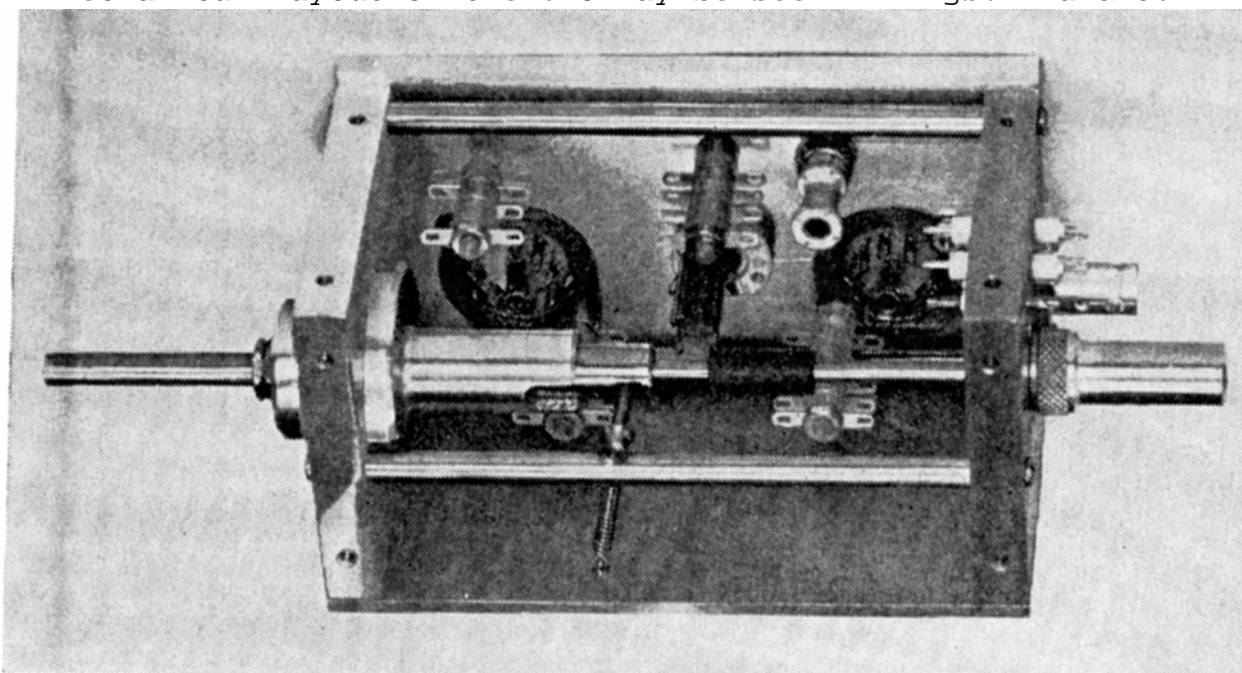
In this view of the partially-assembled p.t.o. unit, the coil has been omitted to expose the tuning slug mounted on the driving shaft. The front bearing guide is notched for the arm that prevents rotation of the slug shaft to permit full lateral movement of the slug. The knurled aluminum sleeve at the left-hand end covers that end of the slug shaft and the coil spring that prevents backlash.
